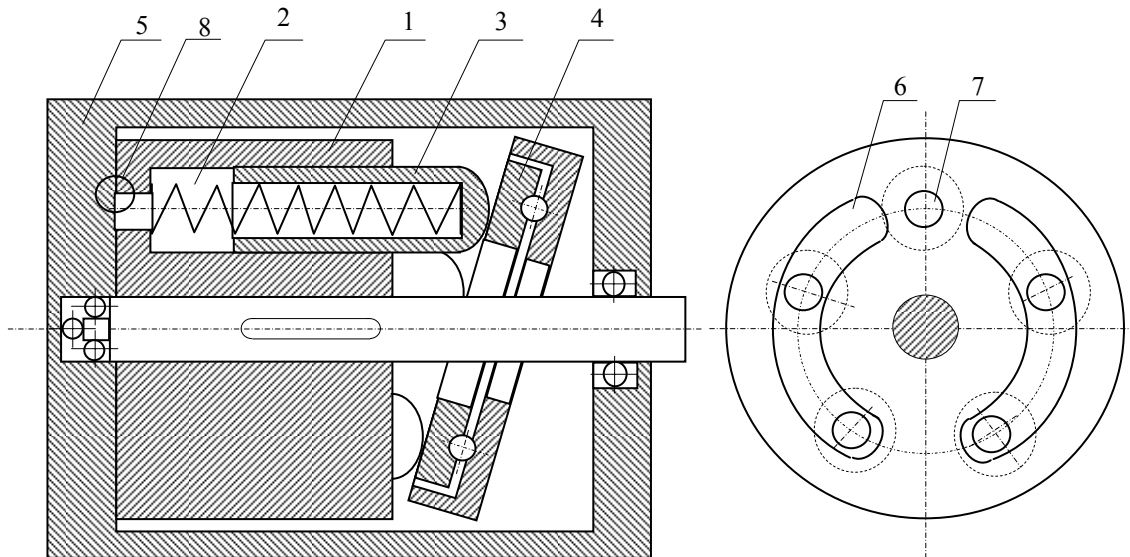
Scheme of hydraulic machine of axial-piston type: 1 - rotor; 2 - cylinder; 3 - piston; 4 - swash plate; 5 - valve plate; 6 - port; 7 - passage; 8 - friction couple
